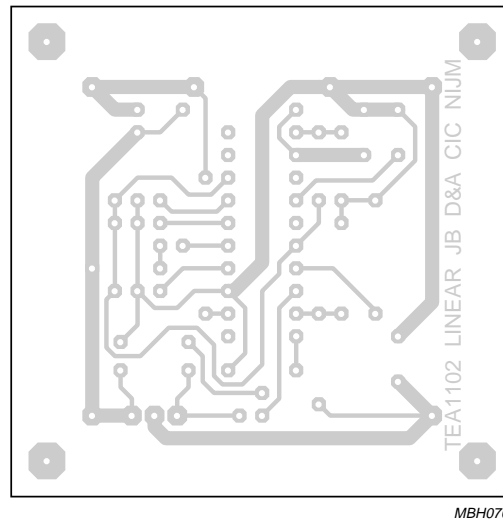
Track side of printed-circuit board (linear application) scale 1 : 1.
